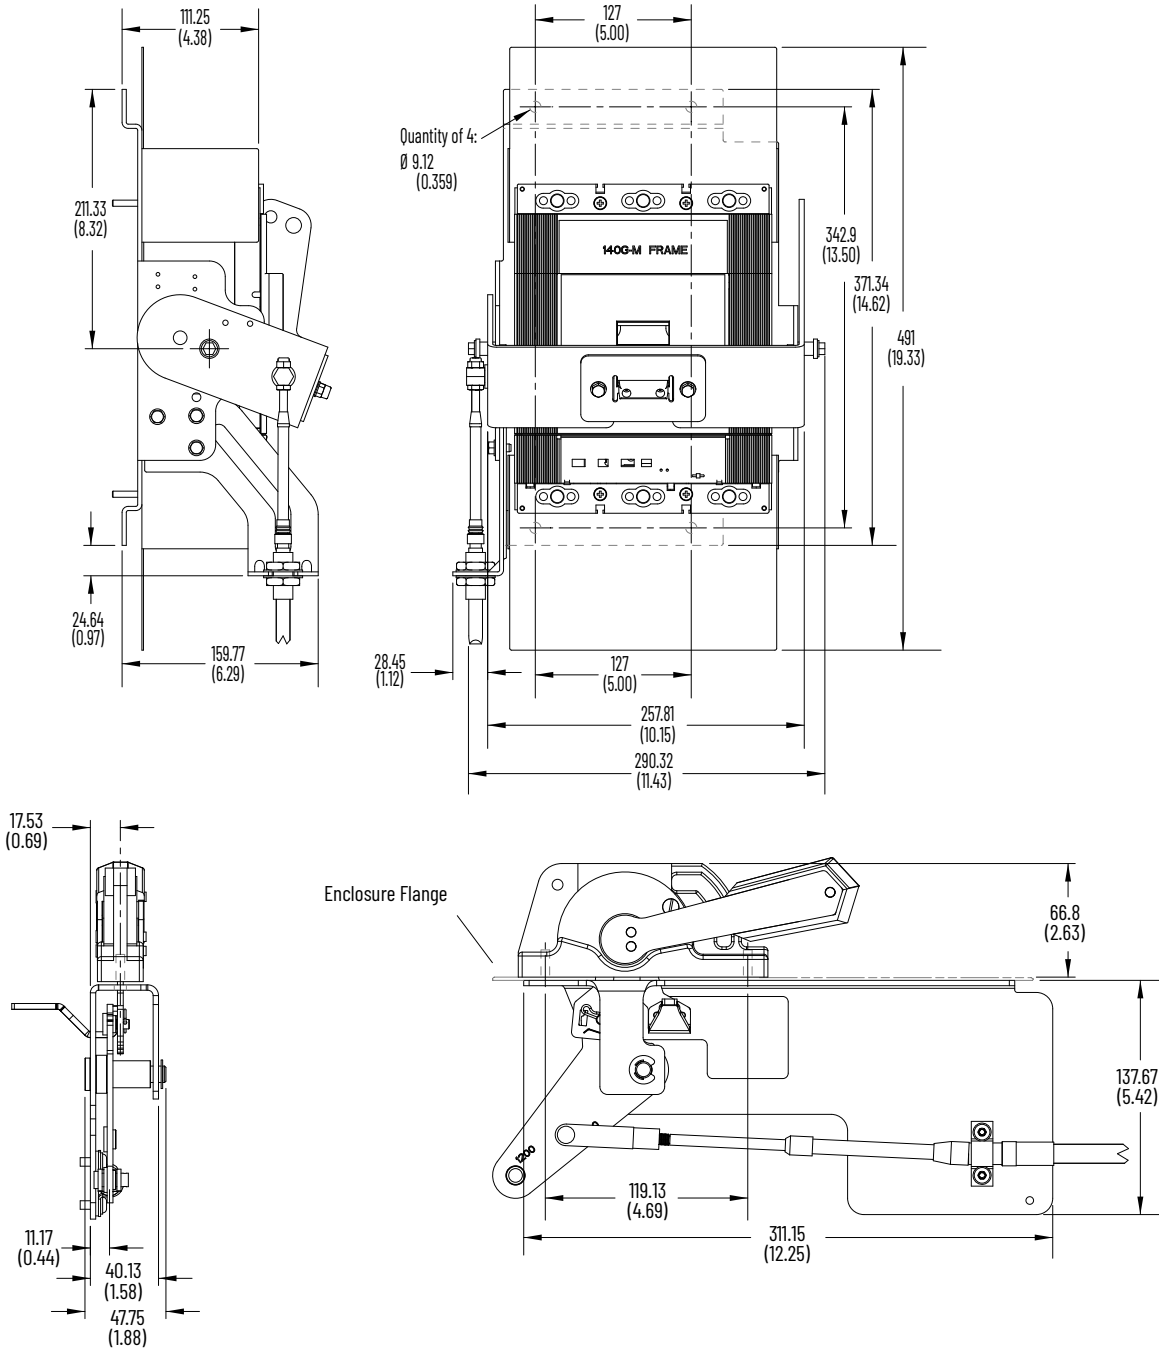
M-Frame Flex Cable Operator and Actuator, Left Hand (requires 140G-BML, sold separately)
